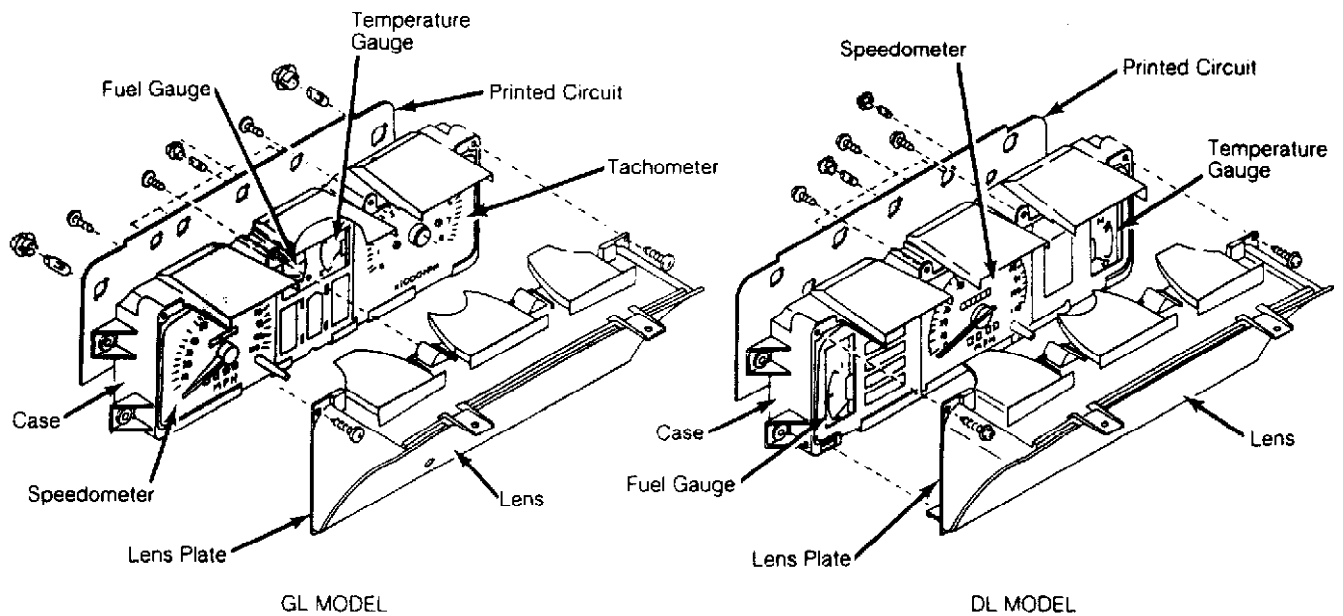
Exploded View Of Instrument Cluster (Loyale)
